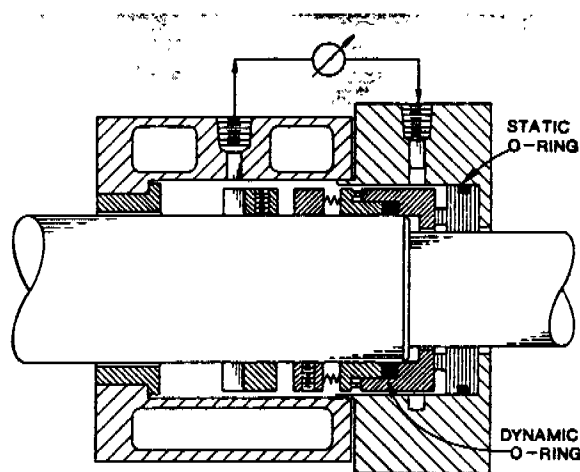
Mechanical seal installation with static and dynamic O-rings.
